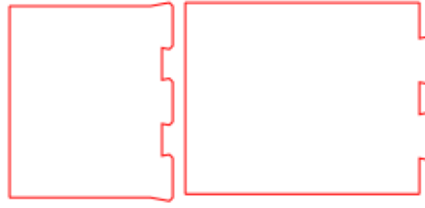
Path which a laser cutter has to follow to cut our plates with JimJoints.
